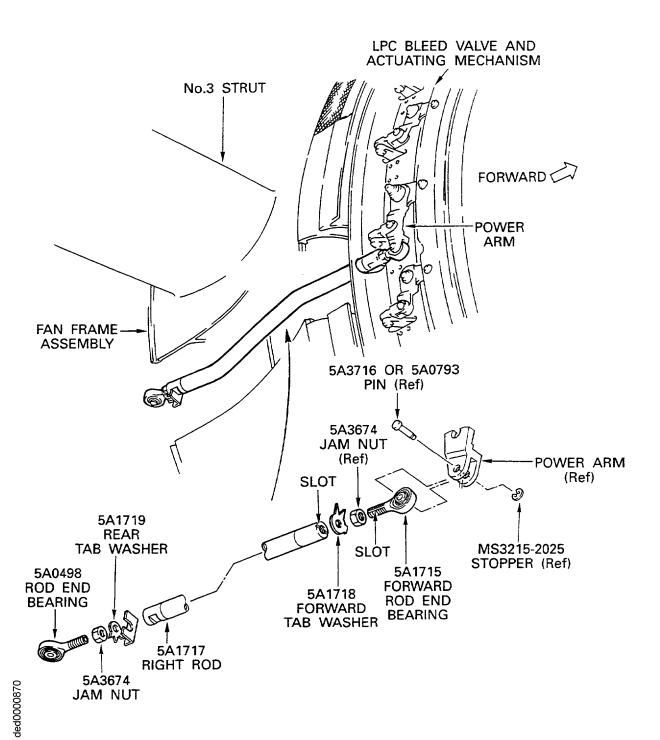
After Alteration of the Right Rod Assembly of LPC Bleed Valve
